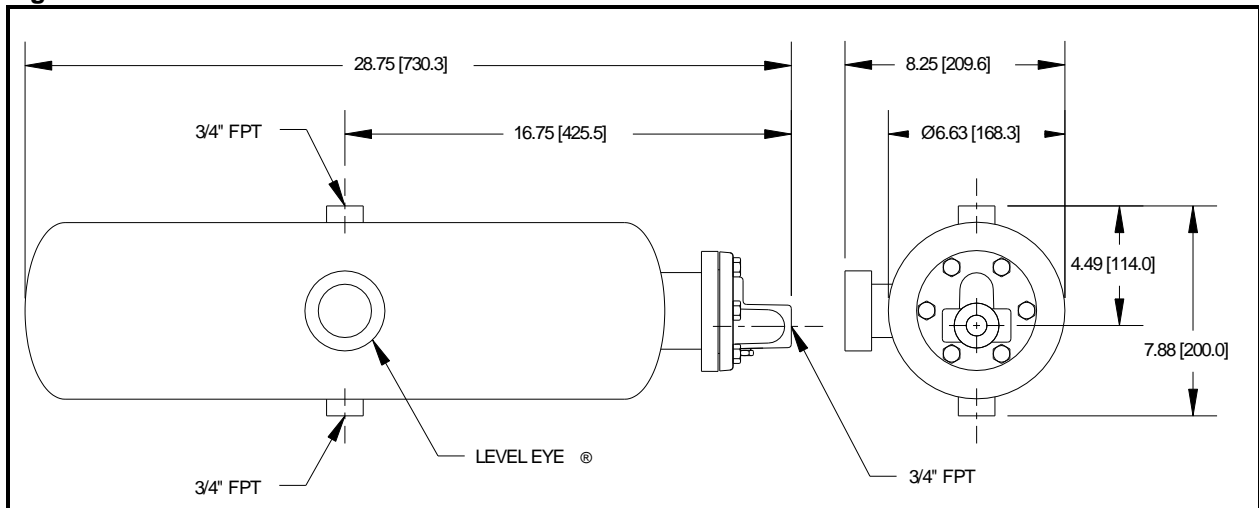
270AX/AY Valve with Welded Steel Chamber
